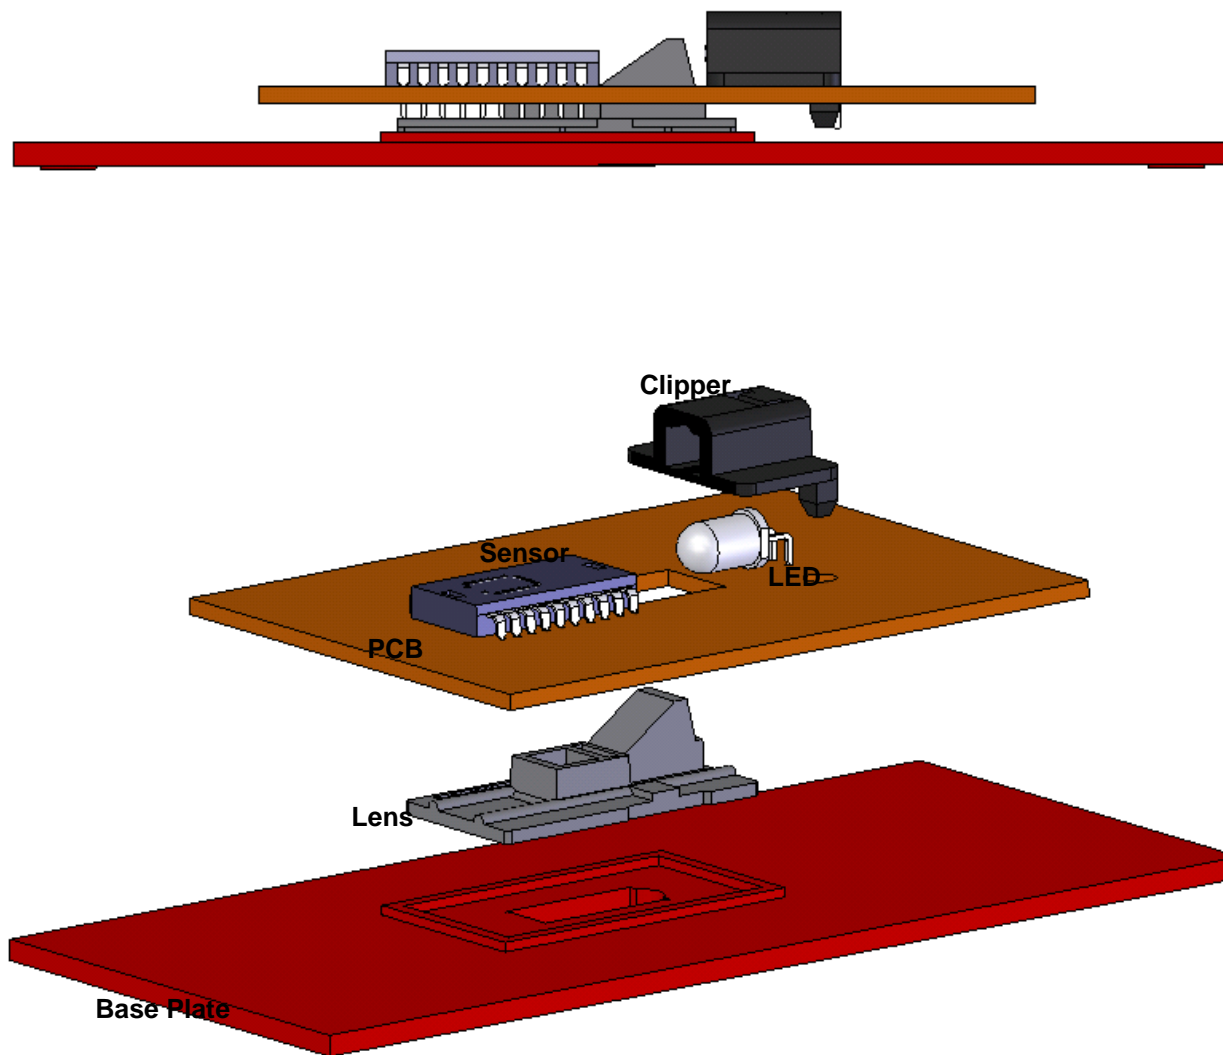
3D Assembly for Mounting Instructions with Trim Lens
